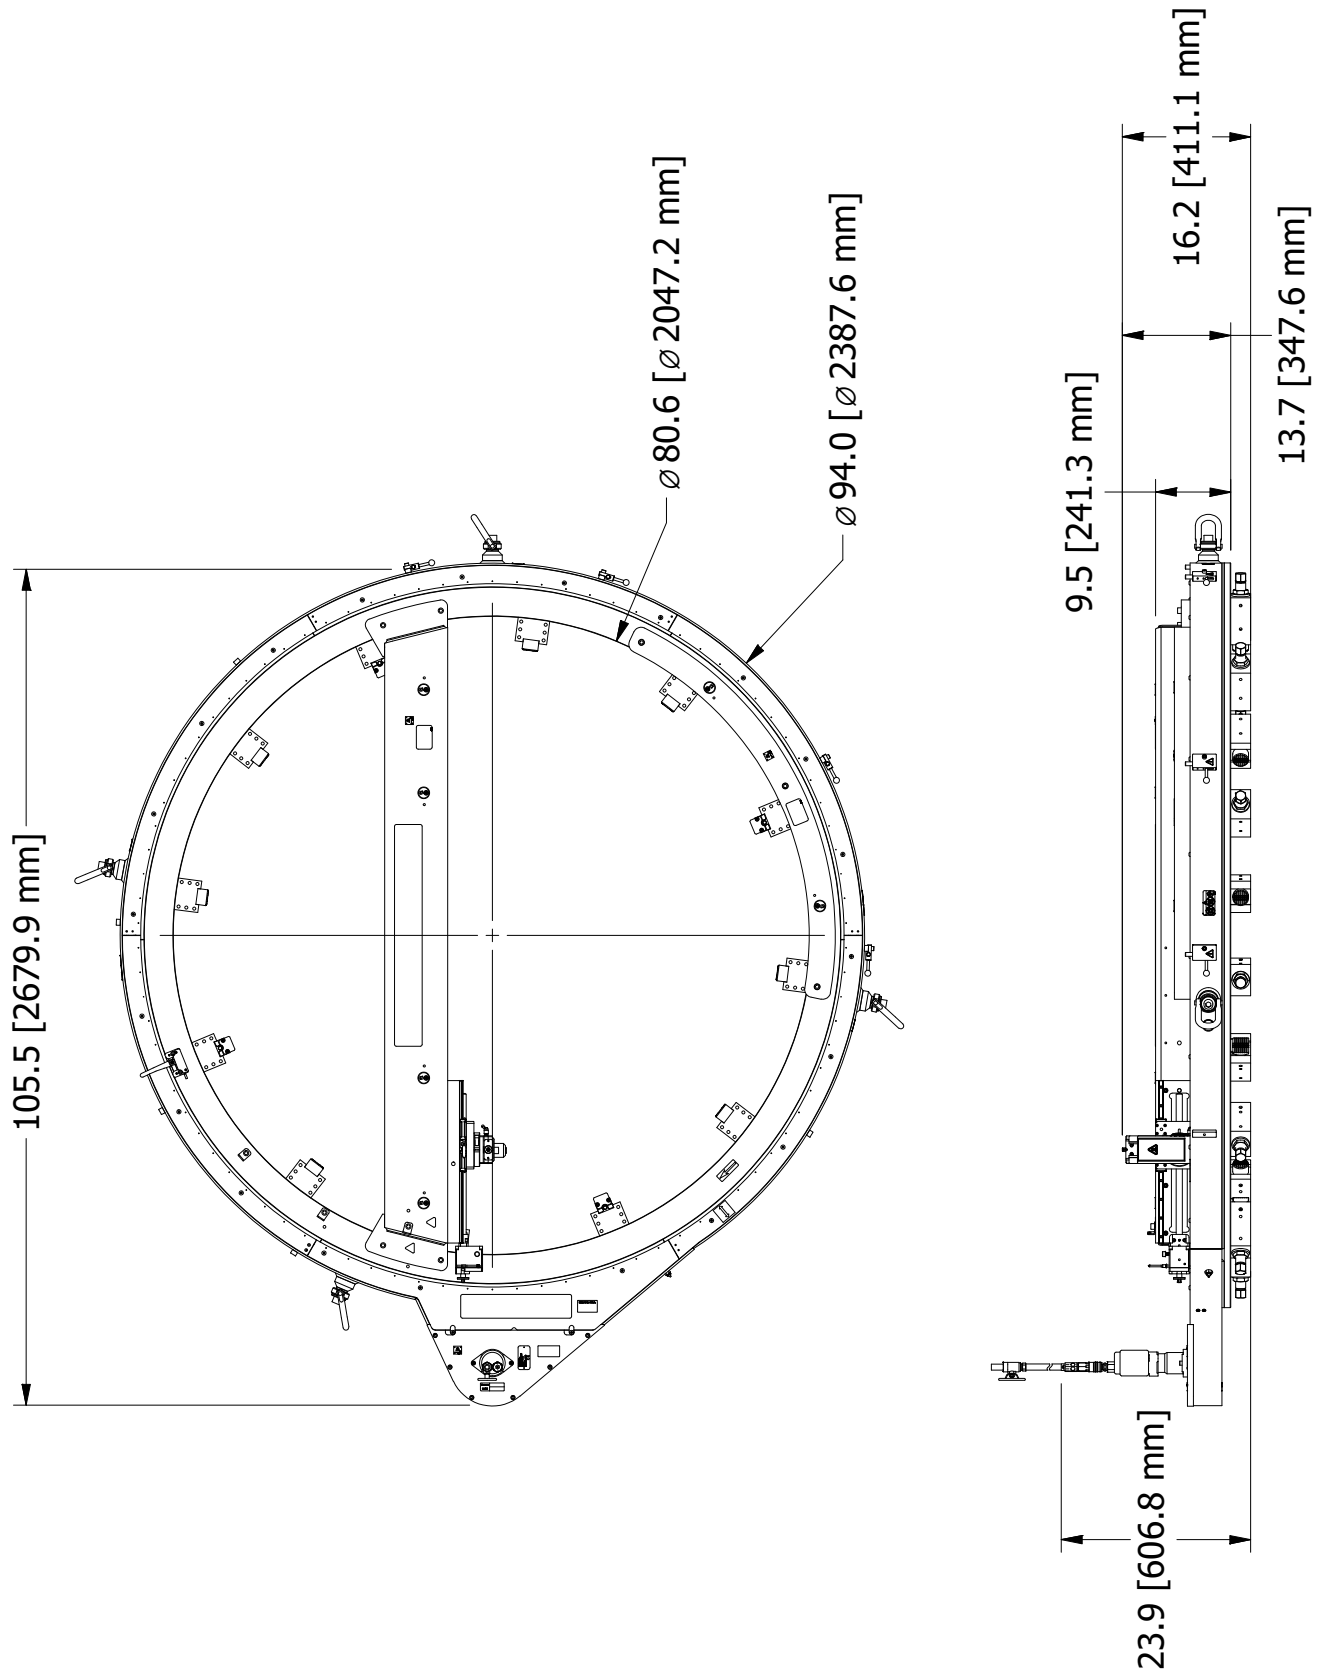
ODF80 SPEED FACER DIMENSIONS (P/N 94770)
